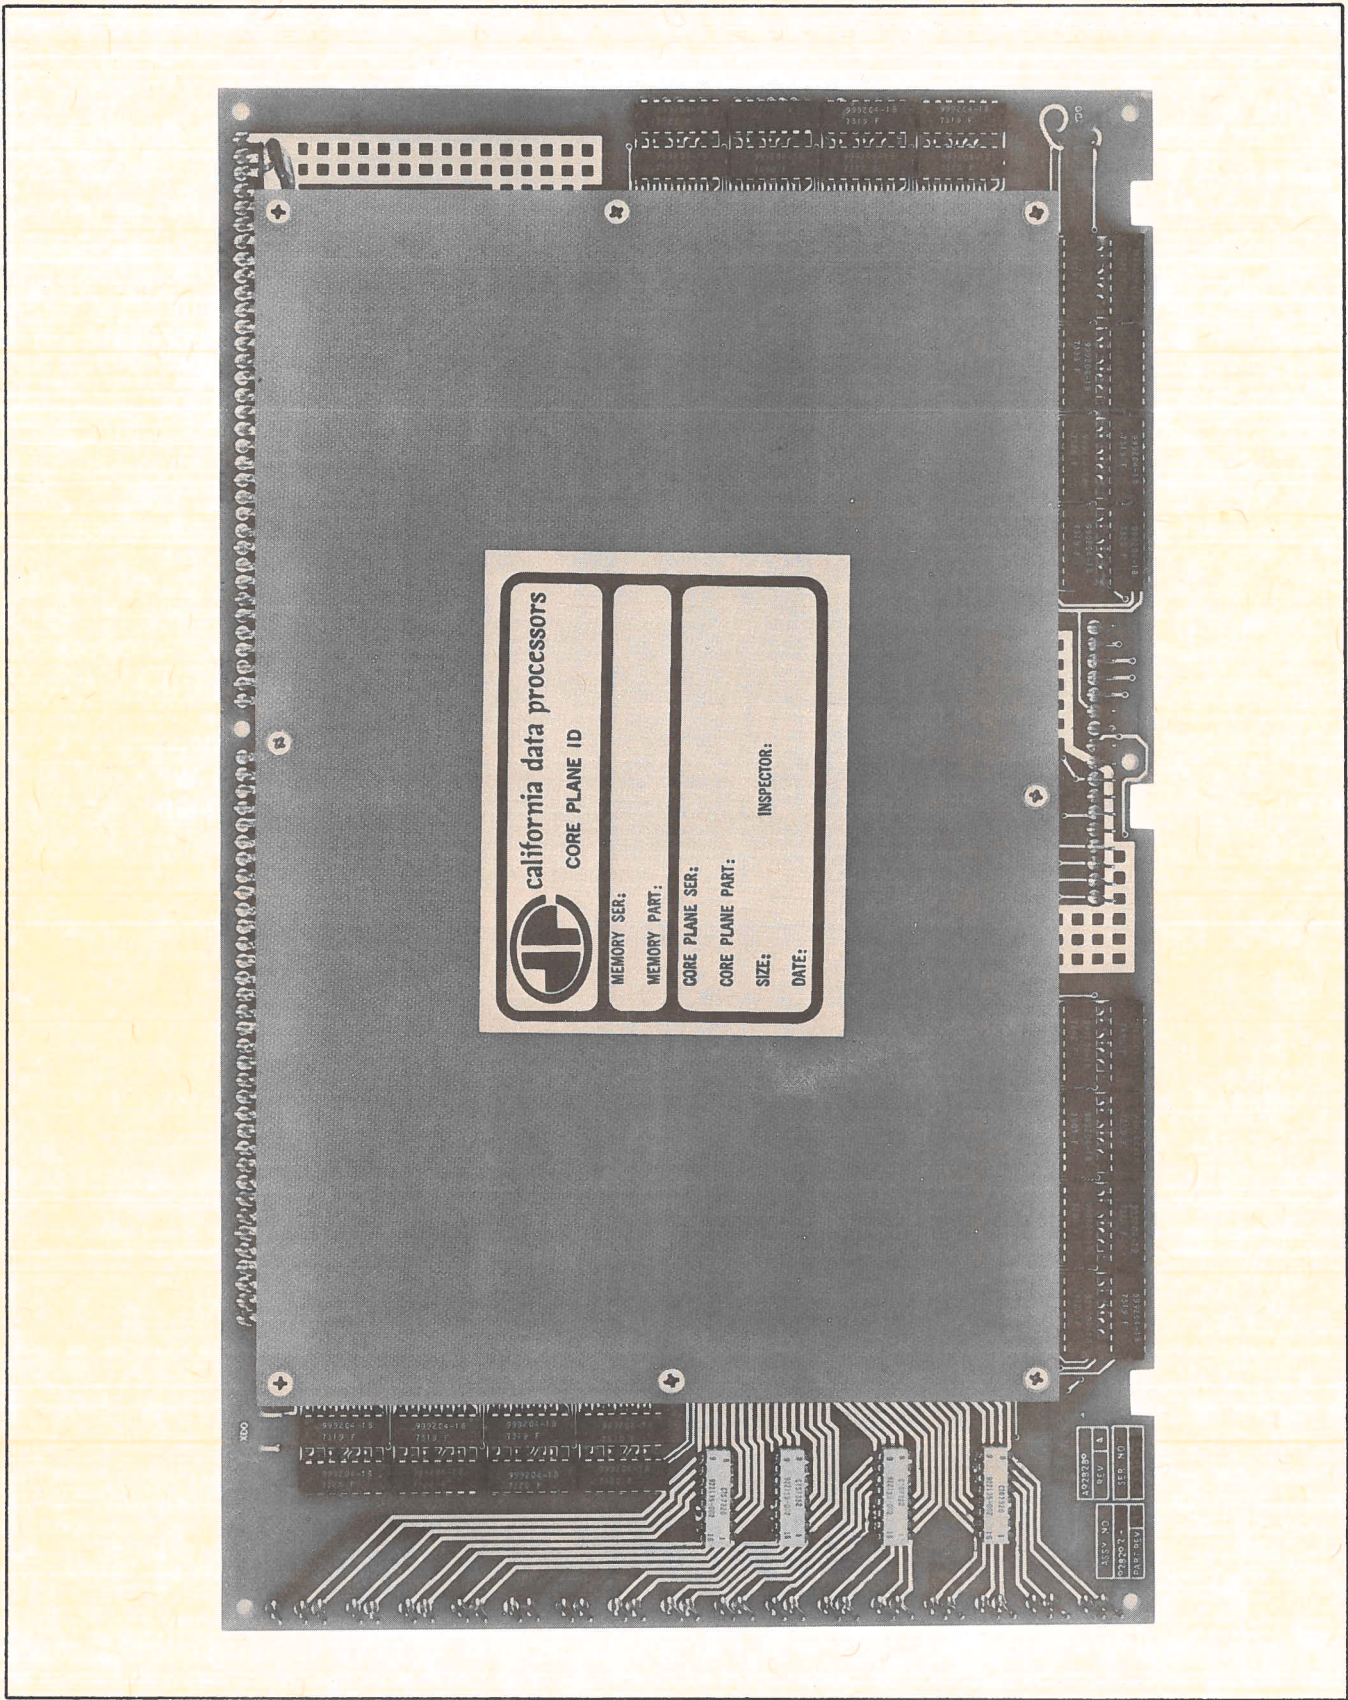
CDP-16KX16 Magnetic Core Memory, Core Plane Assembly
